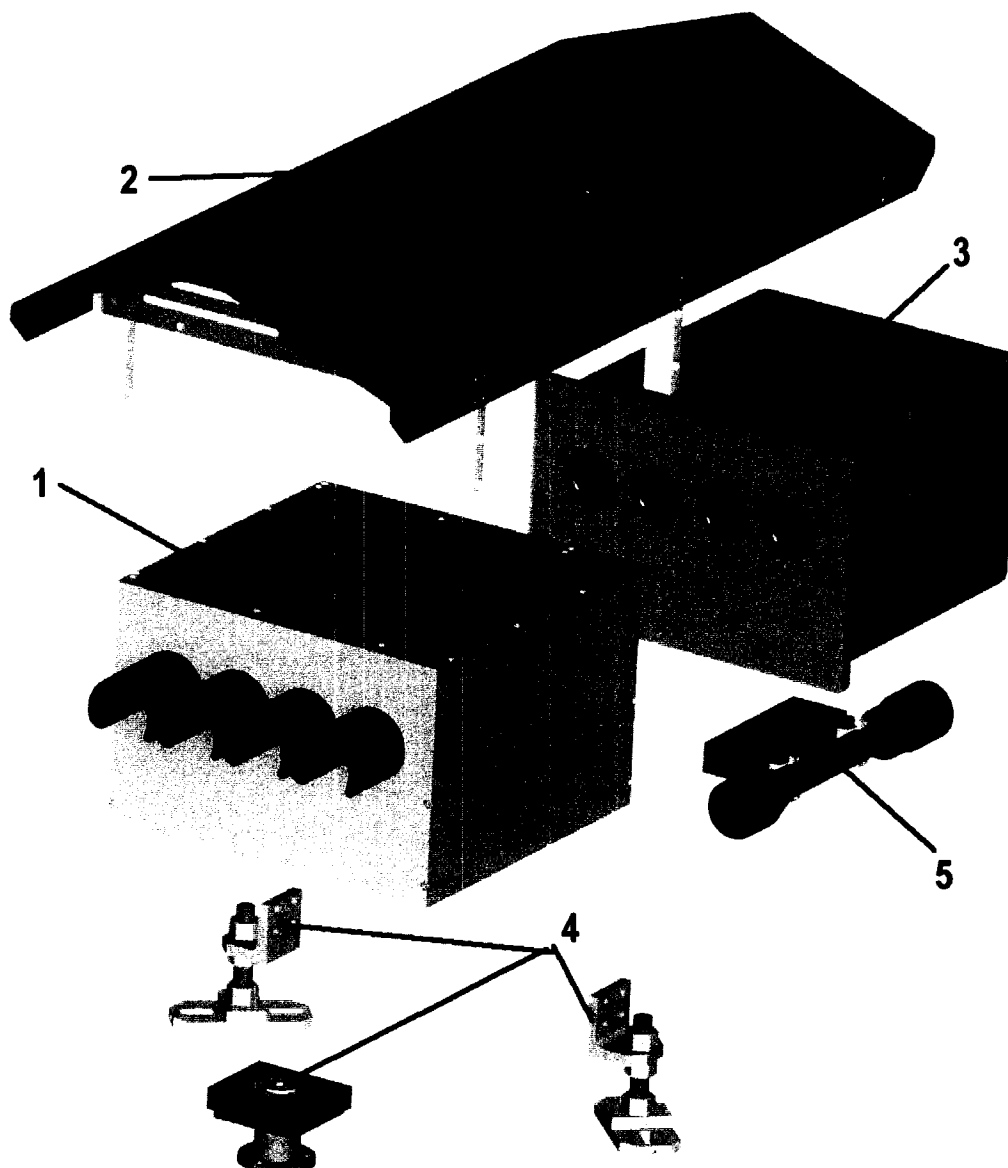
Illustration of the future system modules. 1- optics or configuration module; 2- protective roof; 3- laser and control module; 4- alignment module; 5- removable telescope.
